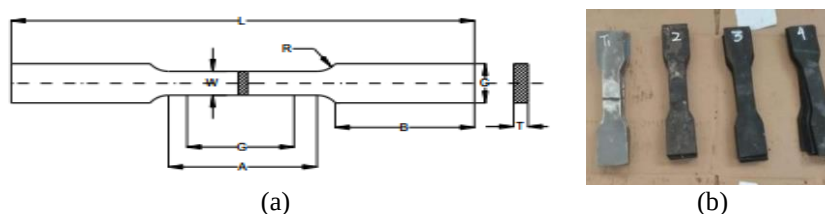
Schematic and physical views of tensile test specimens for SMAW-welded AH36 steel after heat treatment for (a) illustration of specimen dimensions for tensile test based on ASTM E8/E8M-13a standard and (b) photographs of specimens labelled 1–4 for various PWHT conditions
